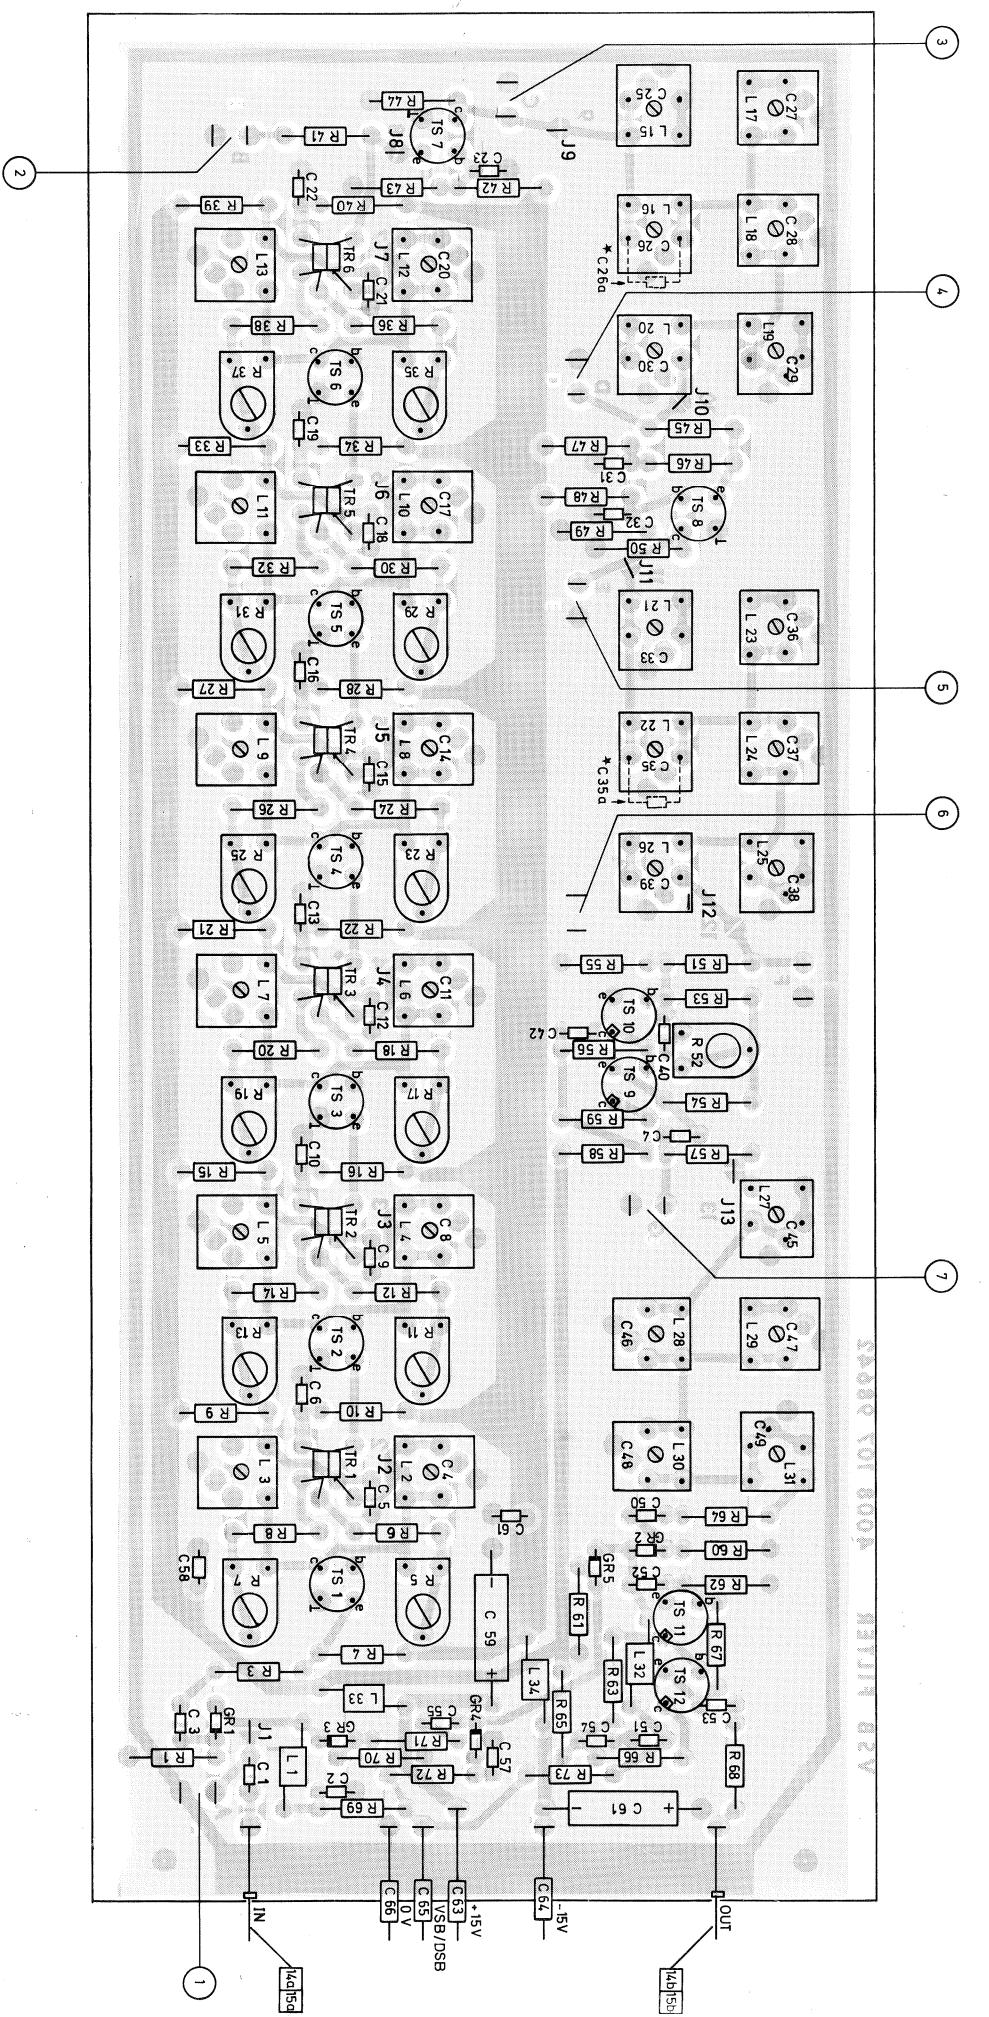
Printed wiring board, VSB-filter, unit 5
